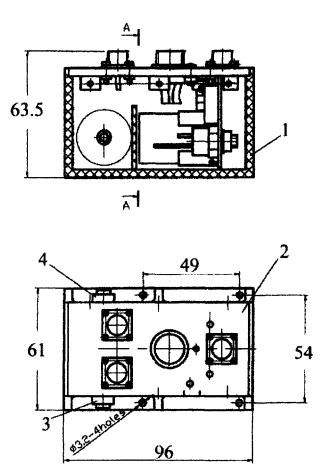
RG-PLC-25 type device drawing. 1 - insulated box; 2 - upper panel; 3, 4 - bushing for HV wire.
